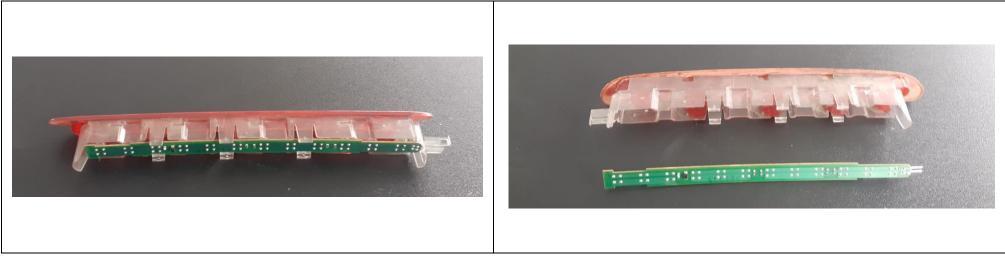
Additional brake lighting level 2 disassembly process – SEAT Leon model II
